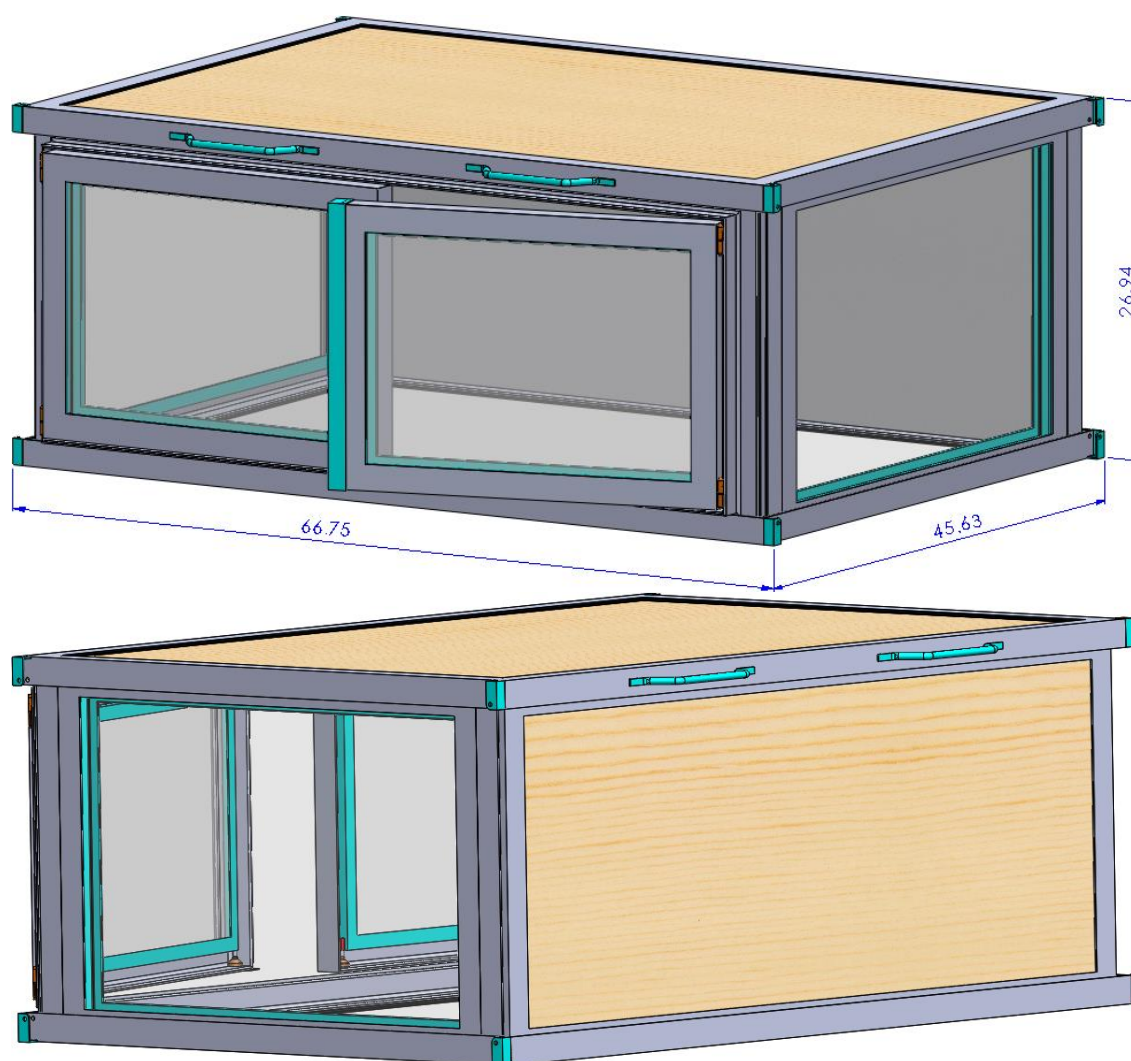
Computer aid drawing of the X-ray enclosure with dimensions in inches.
